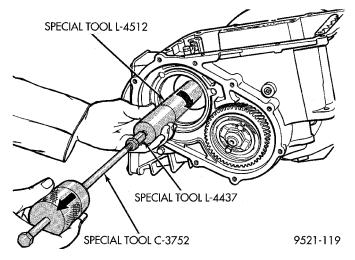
Remove Transfer Shaft and Bearing Retainer Assembly
